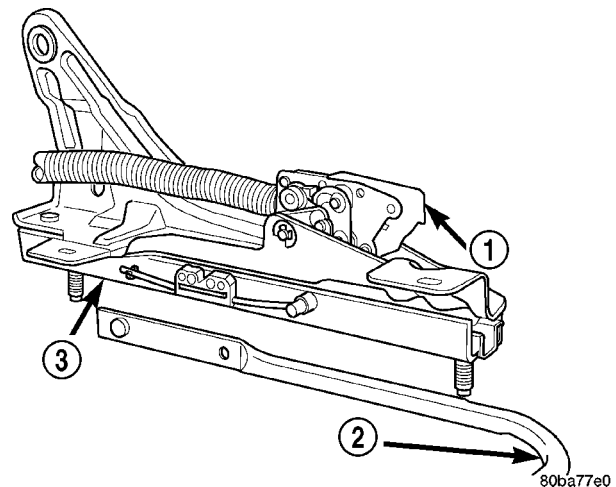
FRONT SEAT TRACK ADJUSTER HANDLE
